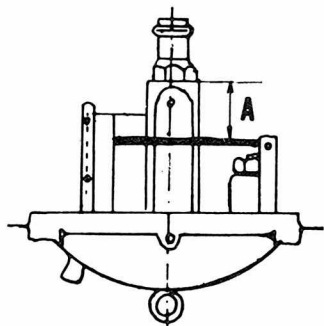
Float level (A) is adjusted by bending portion of float arm that contacts fuel valve assembly (12—Fig. S-14-1).
